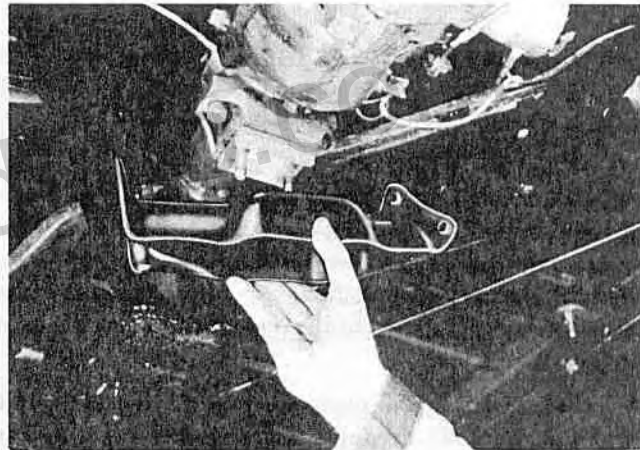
Removing the Engine Rear Support Mounting Cross Member
